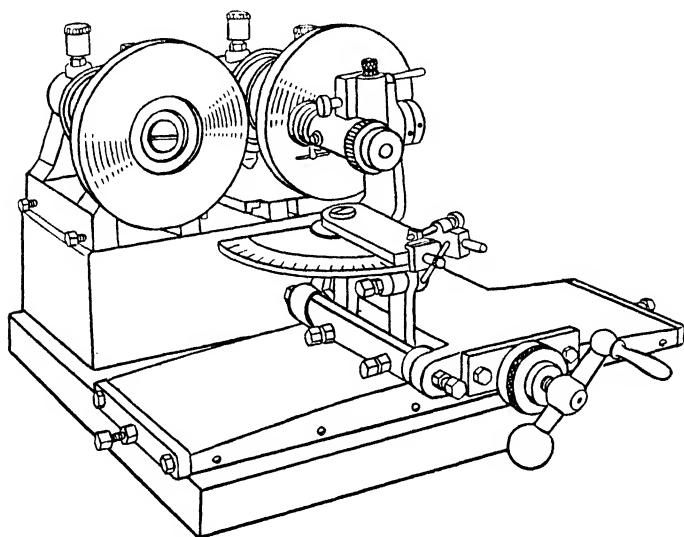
Swiss machine for accurate facet cutting on gem stones
